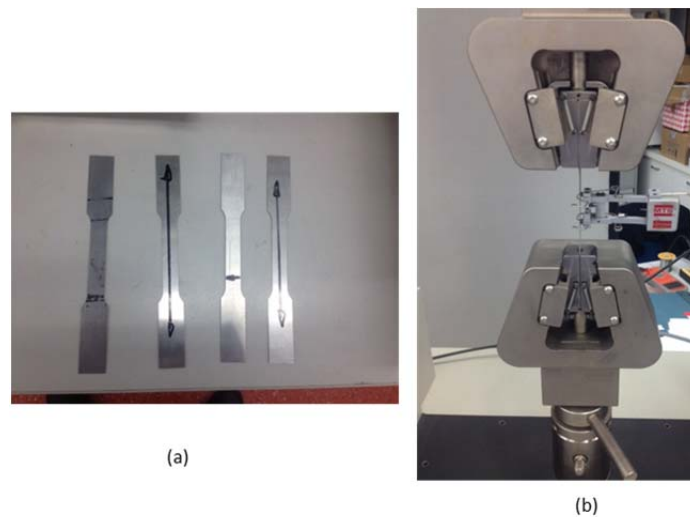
Tensile test of aluminium dog-bone specimens using MTS machine; (a) Front view of aluminium dog-bone specimens; (b) MTS machine.
